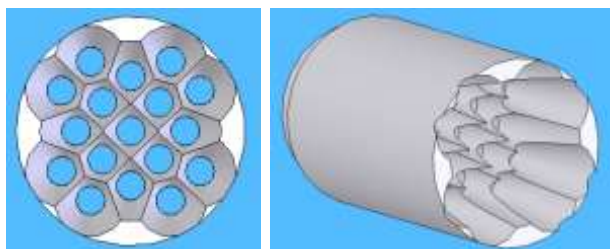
Nozzle D8/17 (17x ø 8 mm holes) [15, 16]
